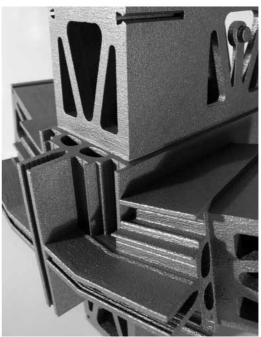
Nematox II mounted to AA-100 mock-up; detailed view of the aluminium part.
